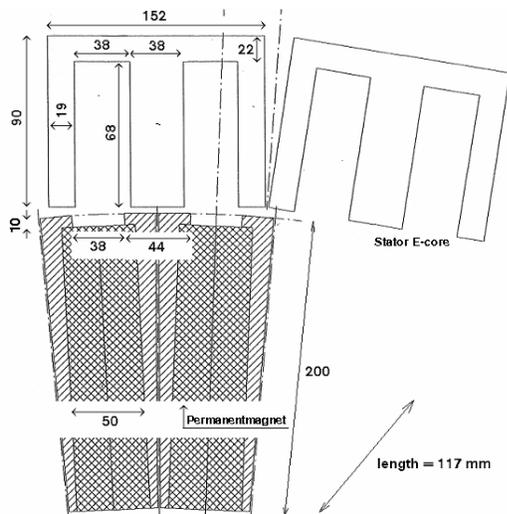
The stator- and rotor modules. Dimensions in mm.
